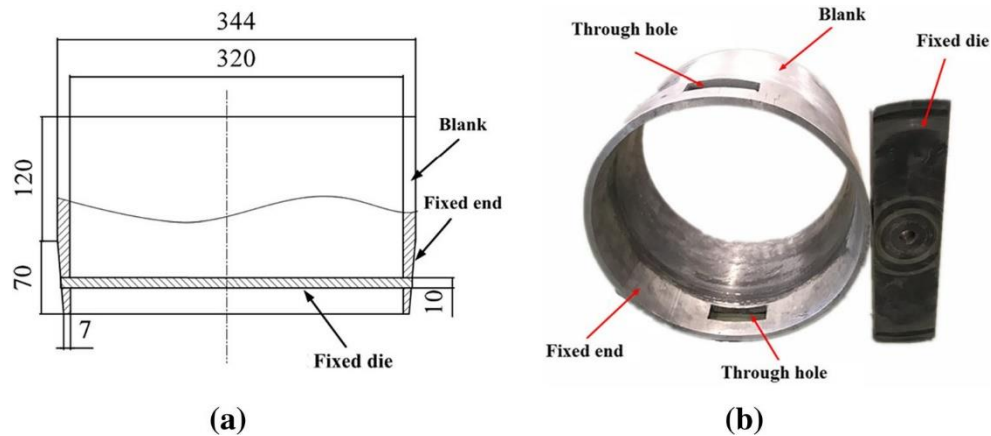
Fixed end and tube blank. (a) Sketch. (b) Experimental scenario
